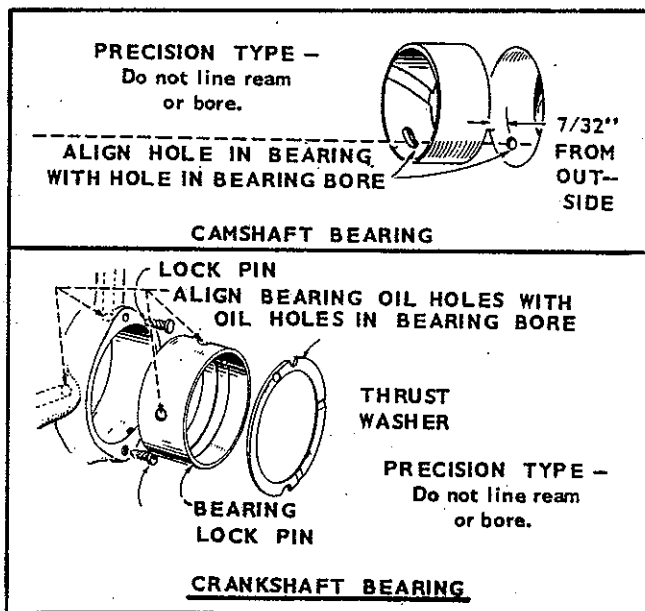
CAMSHAFT AND CRANKSHAFT BEARINGS
